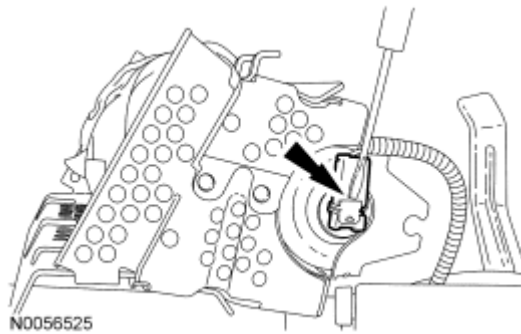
Releasing Locking Button On RH Passenger Air Bag Module Electrical Connector Using A Small Screwdriver
